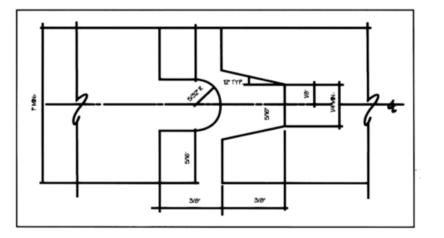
TONGUE-AND-GROOVE DETAIL
